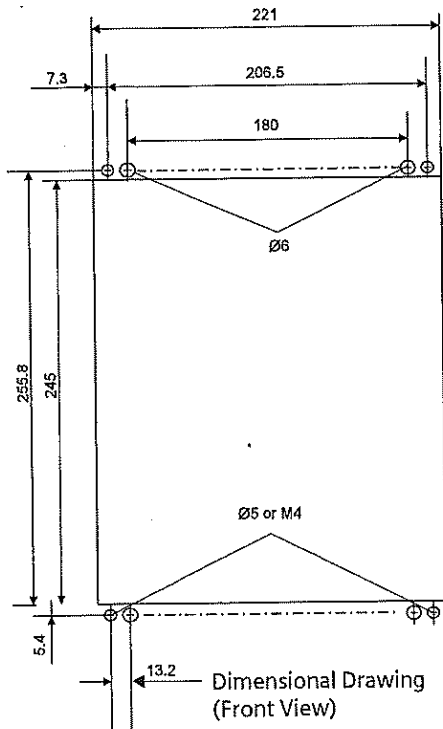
Dimensional drawing of a SIPROTEC 7SJ66 (housing size 1/2)
